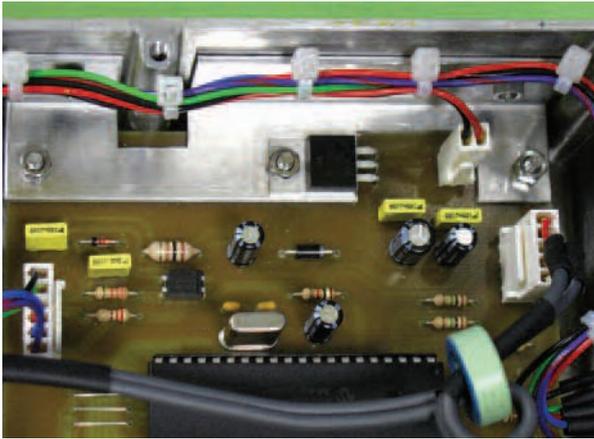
The PCB mounting bracket also serves as a heatsink for the voltage regulator.
